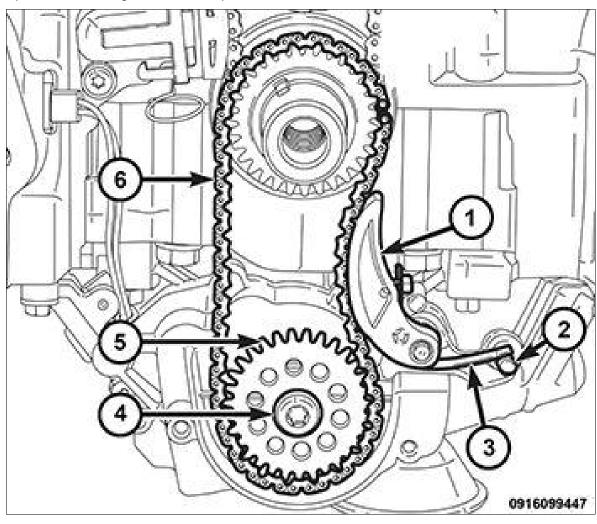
Resetting Left Cam Chain Tensioner By Lifting Pawl, Pushing Back Piston & Installing Tensioner Pin
